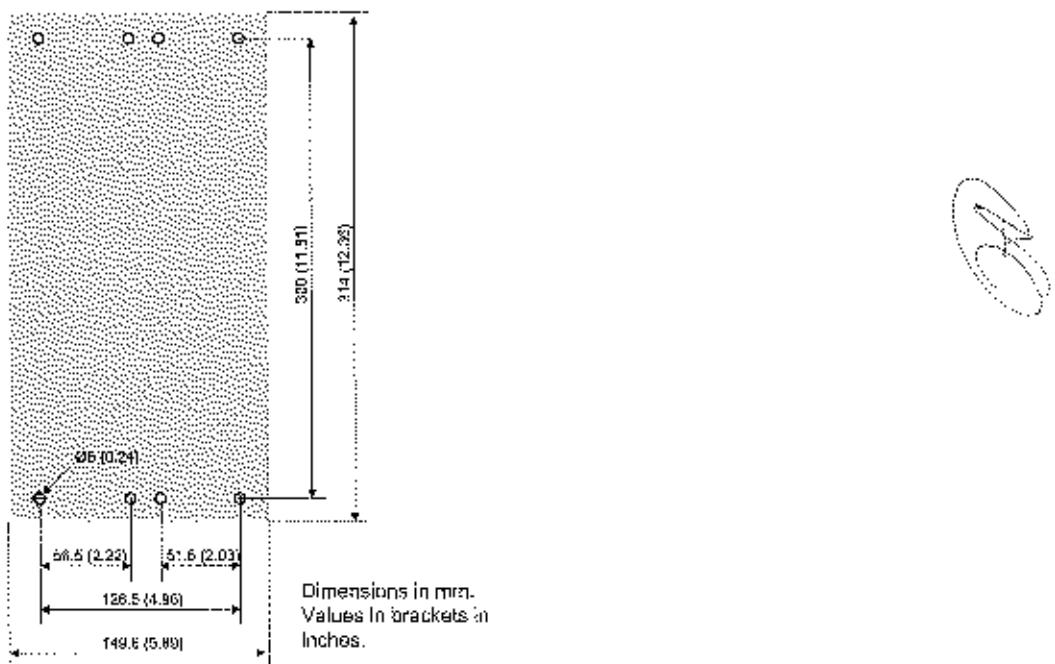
Drilling Pattern of a 1/1 Surface-Mounting Device – 1st Device Row
